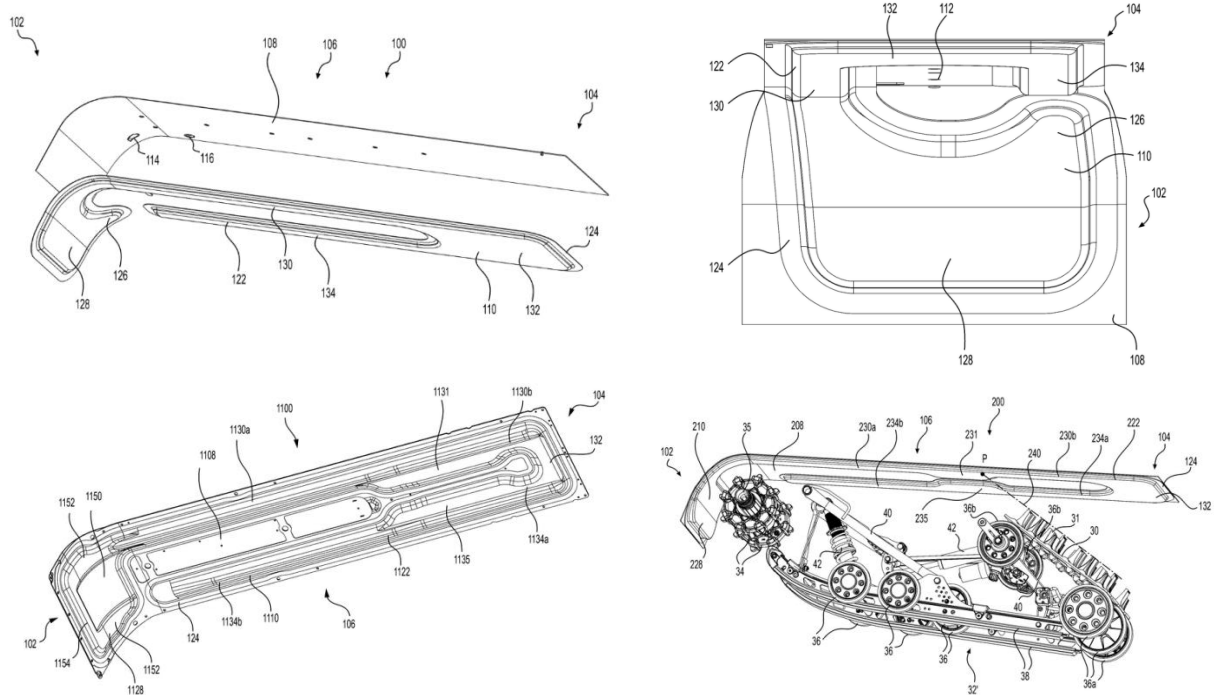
Upper and lower sheet forming the heat exchanger assembly with passage for the coolant, detail of collector area and geometry, joined heat exchanger, and installation position with undercarriage, all pictures taken from US20170158046A1
